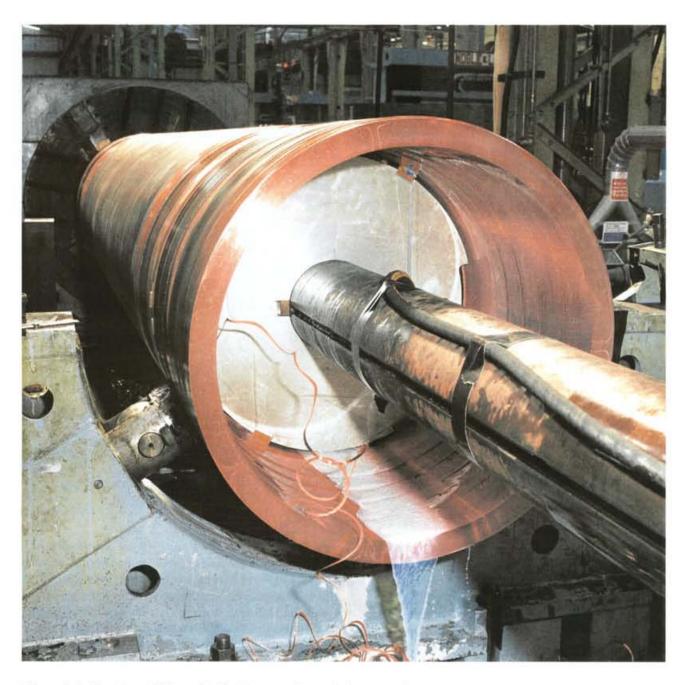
Rough machining of inside diameter of extruded copper tube.
